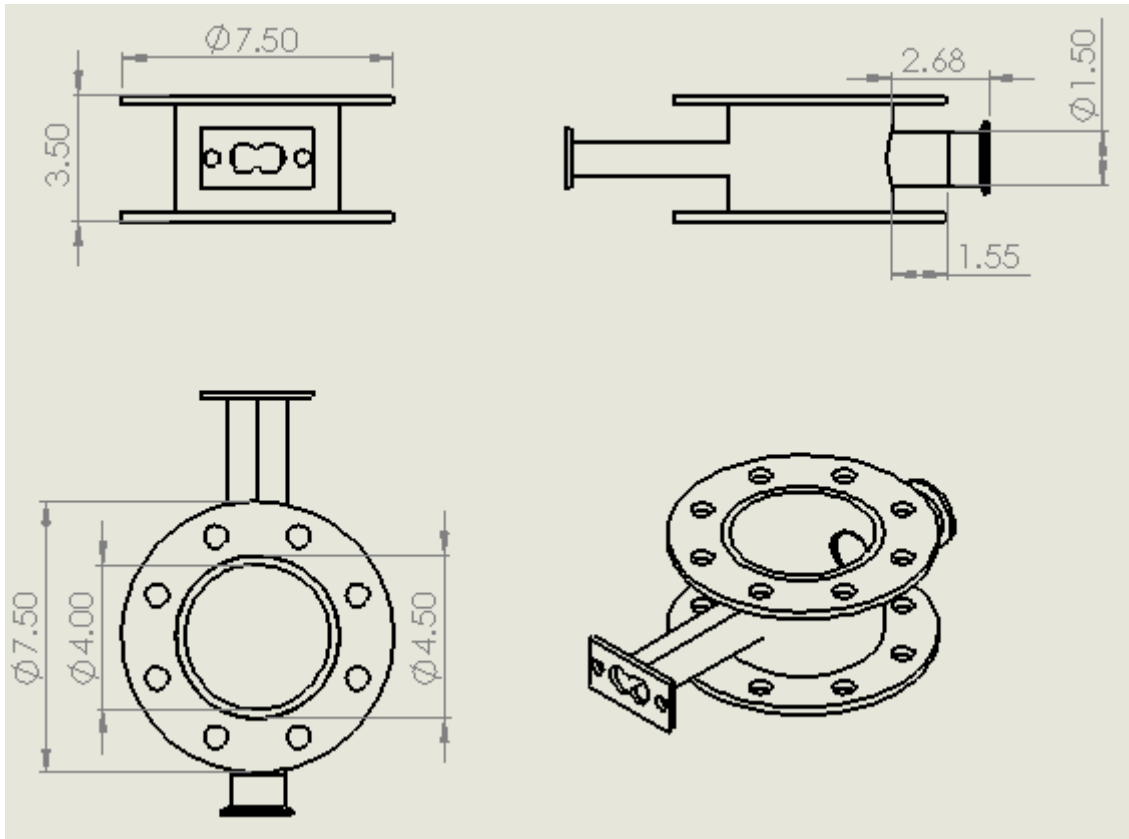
The additional piece added to the old gasifier. The inlet of the solid fuel has the shape of a two pipes welded together since it consists of two screws pushing the fuel into the reactor.
